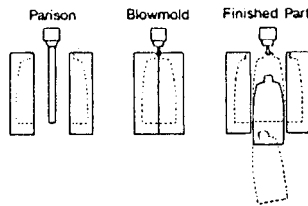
(a) Extrusion Blow Molding of a Bottle [Miller, 1983]. The parison (plastic hollow tube) is extruded from the die head, the molds close, the part is blow molded, the molds open, and the part is ejected.
